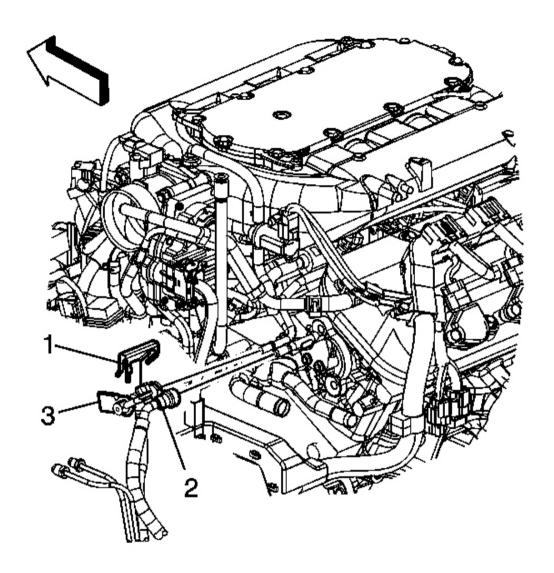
View Of Fuel Hose/Pipes Courtesy of GENERAL MOTORS CORP.
